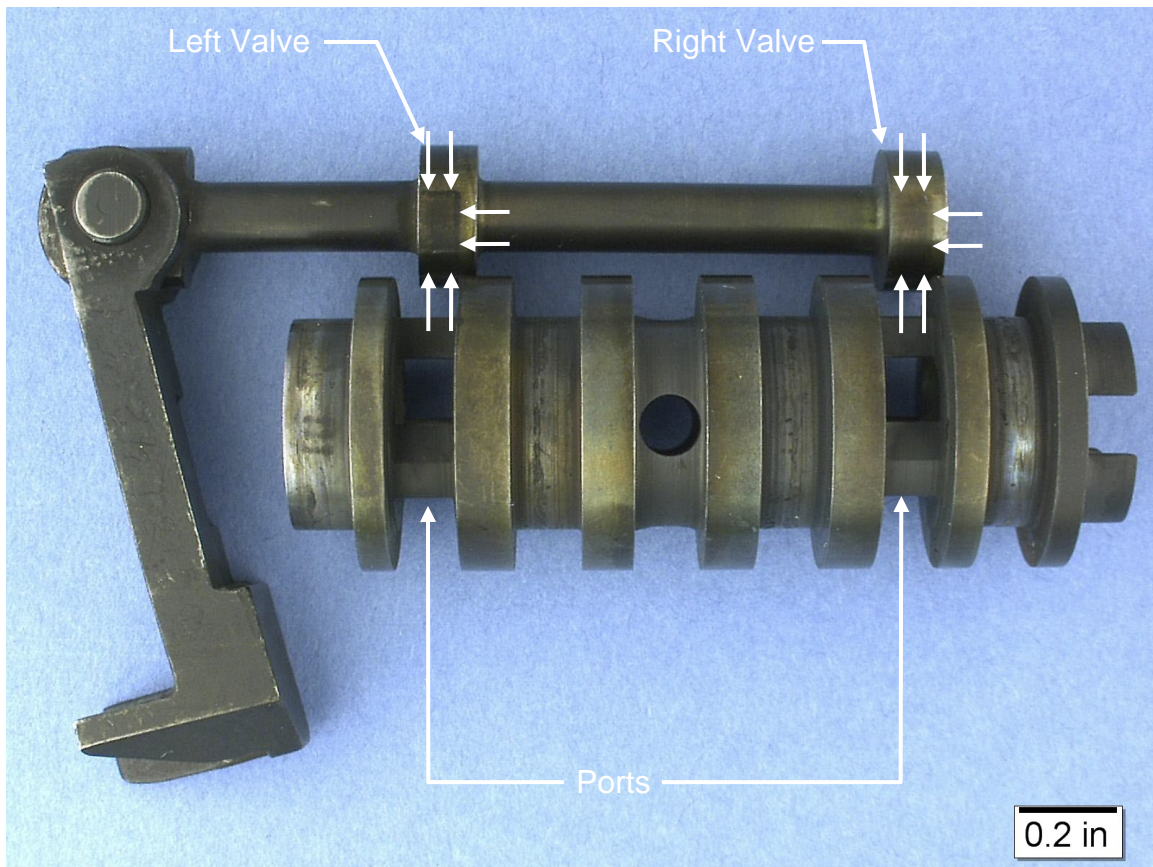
Photograph of the piston and sleeve from the Number 1 engine pilot valve. The valves on the piston have dark rectangular regions indicated by short arrows that are similar in size and shape to the stator vane actuator ports on the sleeve.
